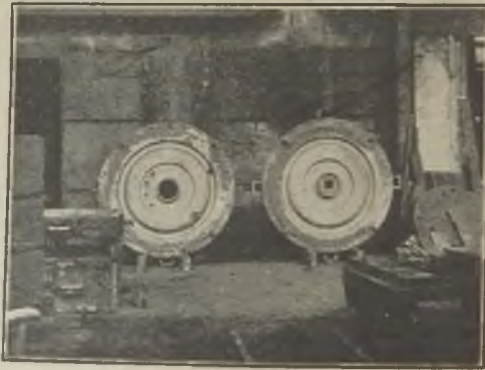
TOP AND BOTTOM PARTS READY FOR STOVING.
